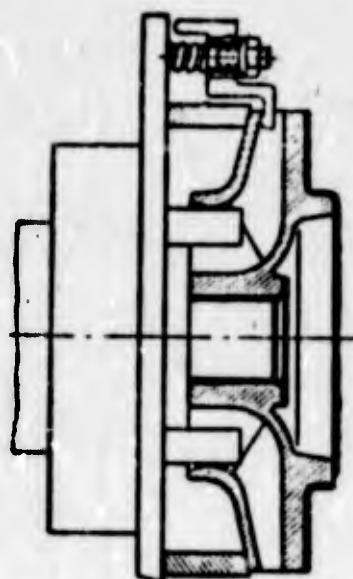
Turning of faces, and external band, and boring of hole in shrouded impeller.
